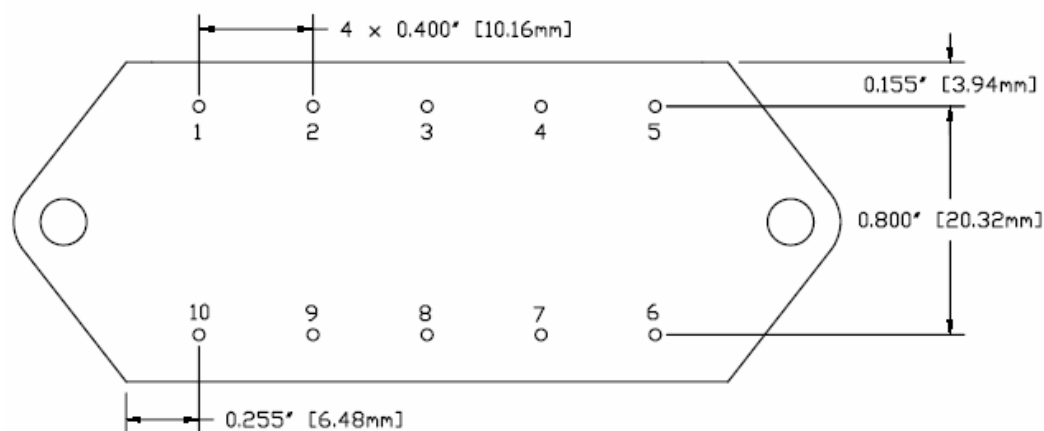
Flanged, Solder Seal Tin Plated Package and Pinout (Not Used for /HB or Higher Screened Products)
